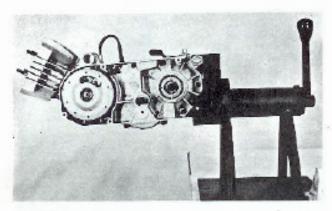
Mount the crankcase on the special engine mount #1. This will allow the engine to be rotated as required during strip down.
